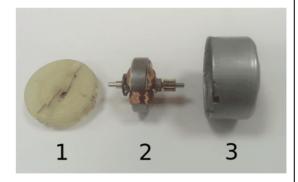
DC motor disassembled: 1 — cap, 2 — rotor, 3 — stator.
